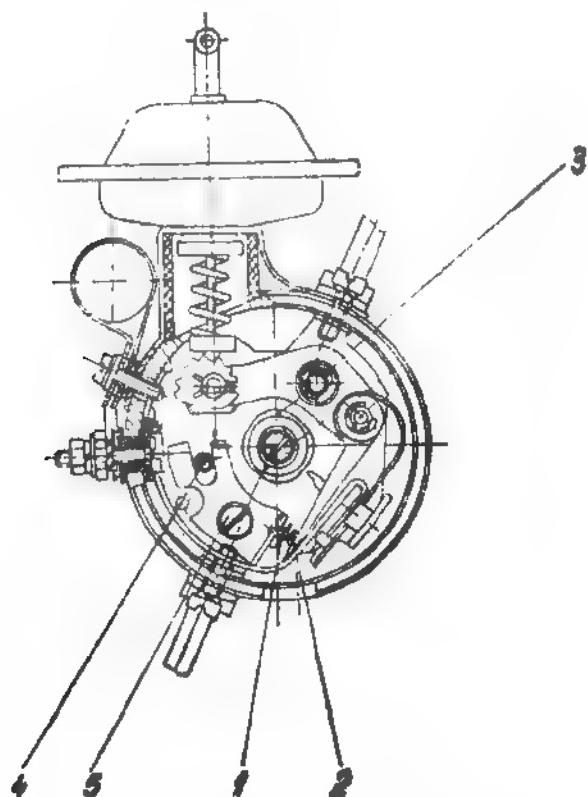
TOP VIEW OF IGNITION DISTRIBUTOR WITH COVER.
